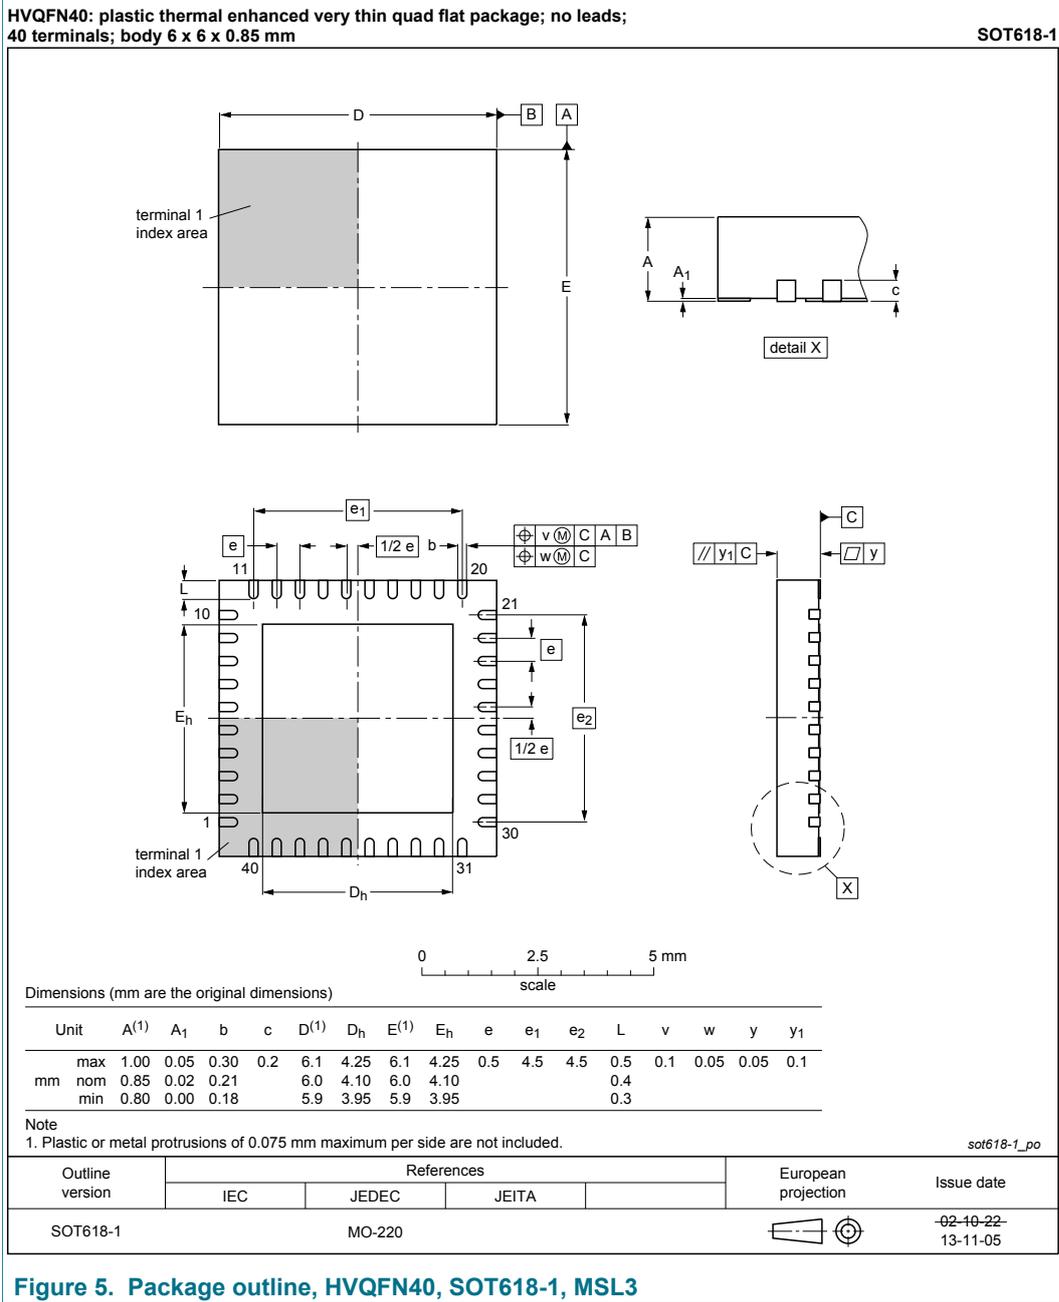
Package outline, HVQFN40, SOT618-1, MSL3
